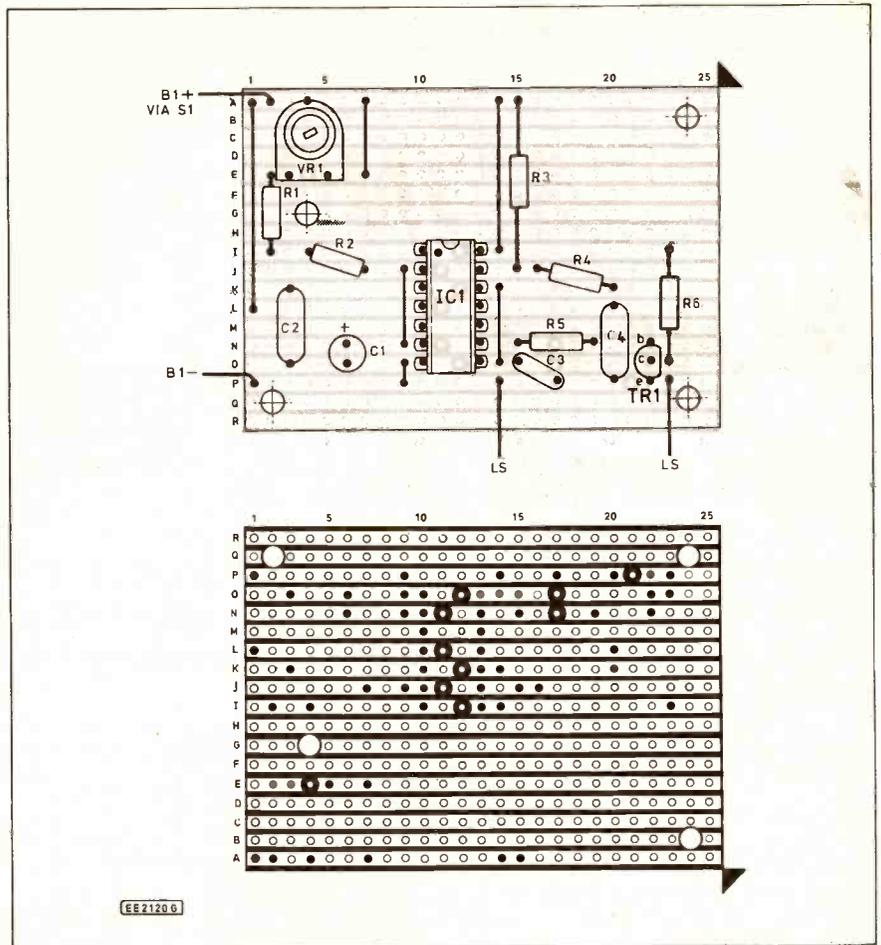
Stripboard component layout and details of breaks required in the underside copper strips.
